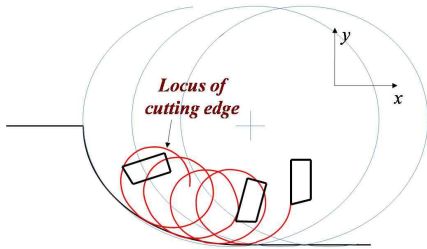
Locus of cutting edge in 2D-vibrational milling
